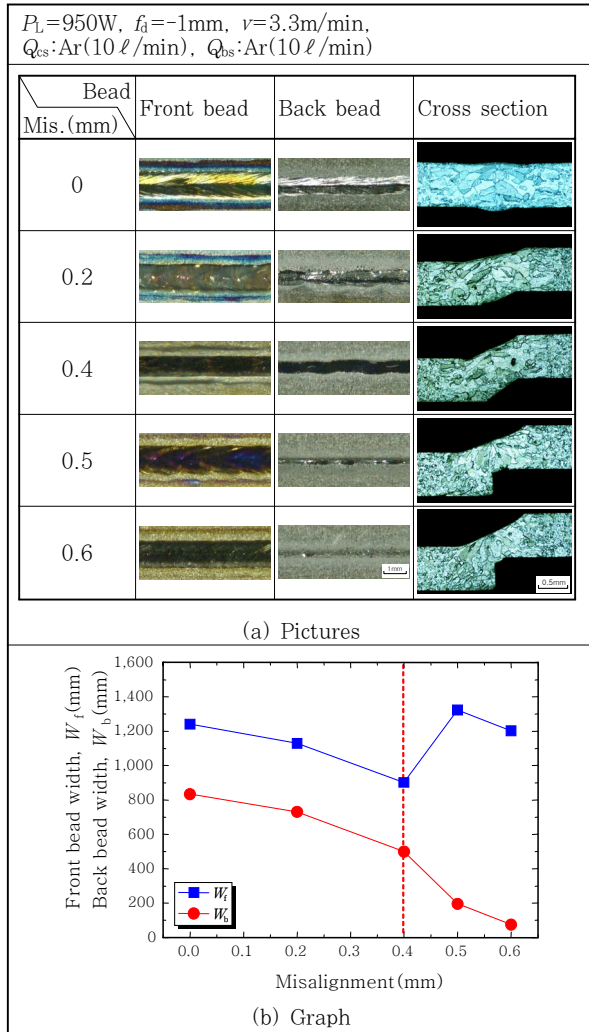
Welding properties with misalignment for butt welding(Titanium)
